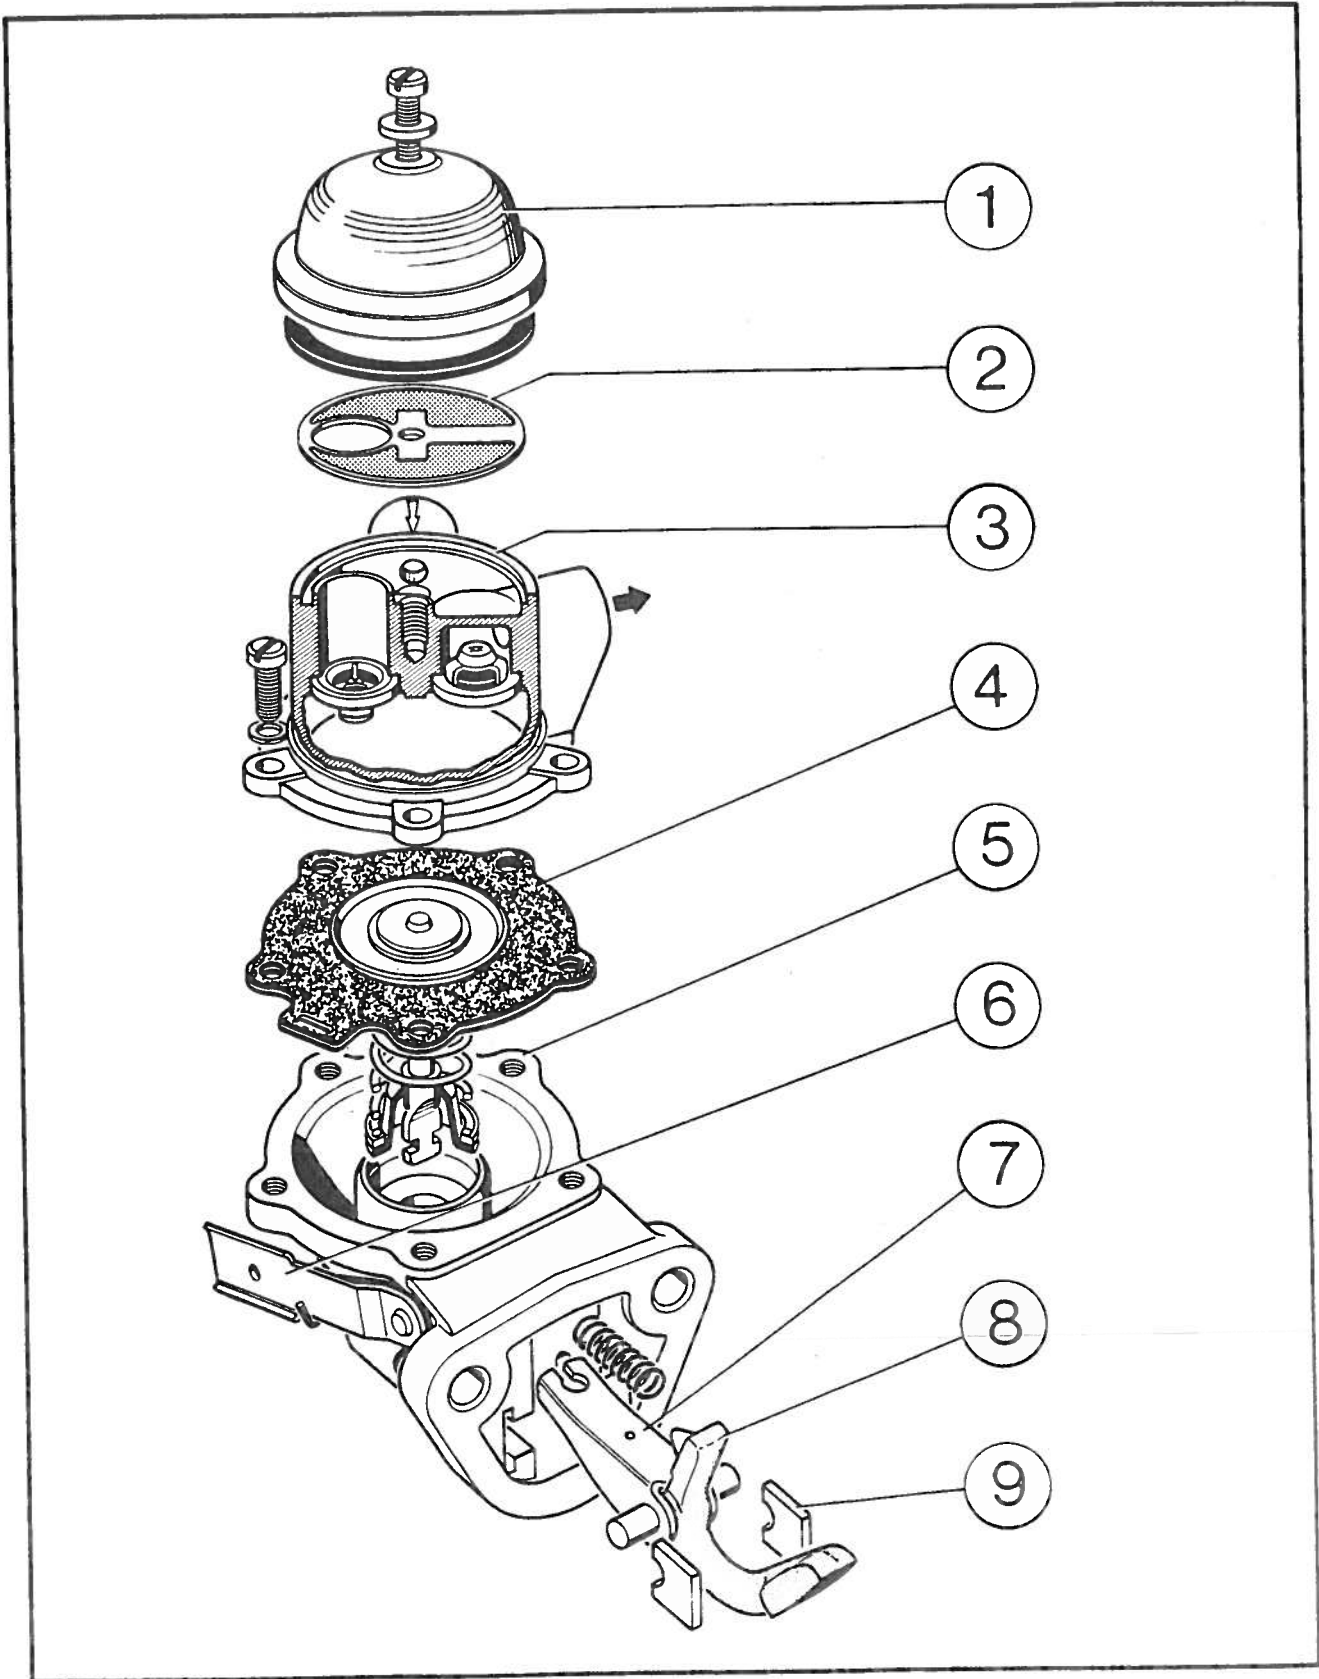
CAV FUEL LIFT PUMP - STANDARD
